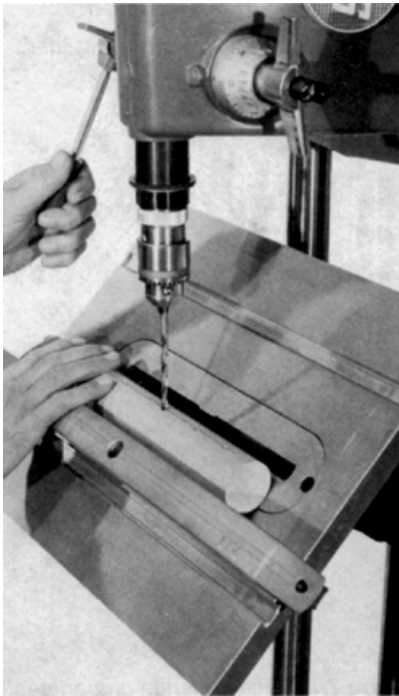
The table and the fence, positioned this way, make a perfect V-block for holding a workpiece that requires diametrically accurate holes. Line the “V” with scrap blocks when drilling holes through the workpiece.
